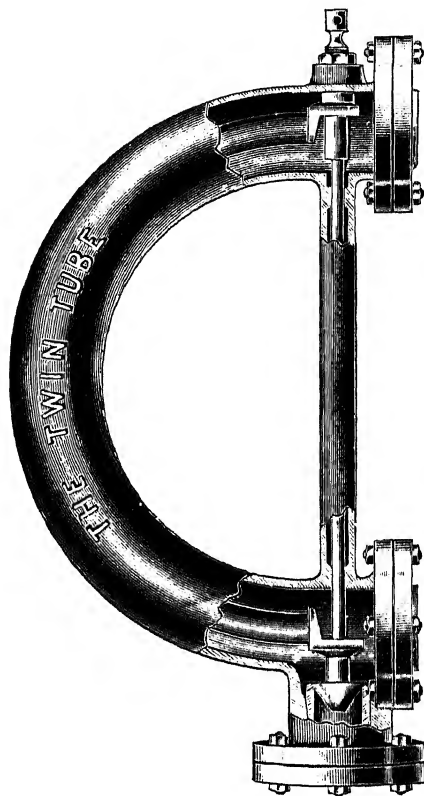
Part Sectional Elevation of the "Twin-tube" Trap.
